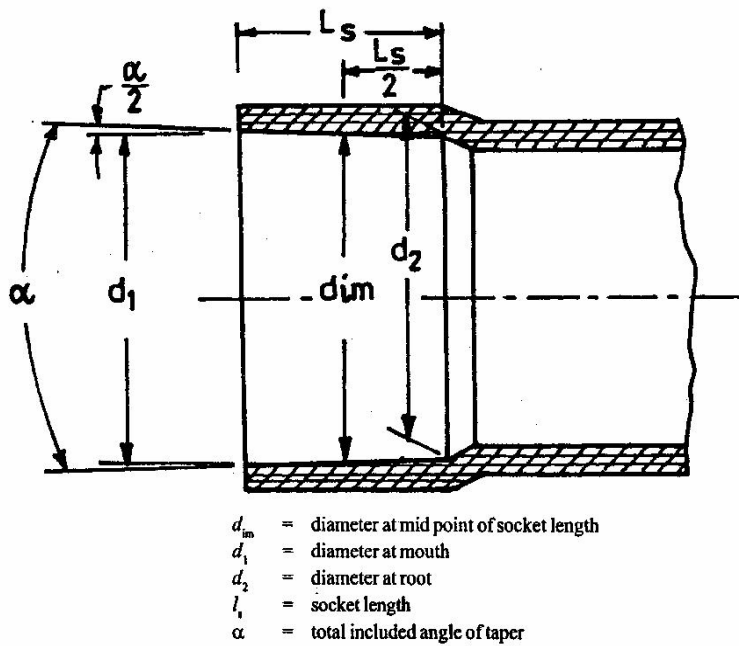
SOCKET DIMENSIONS FOR SOLVENT CEMENT JOINTS
